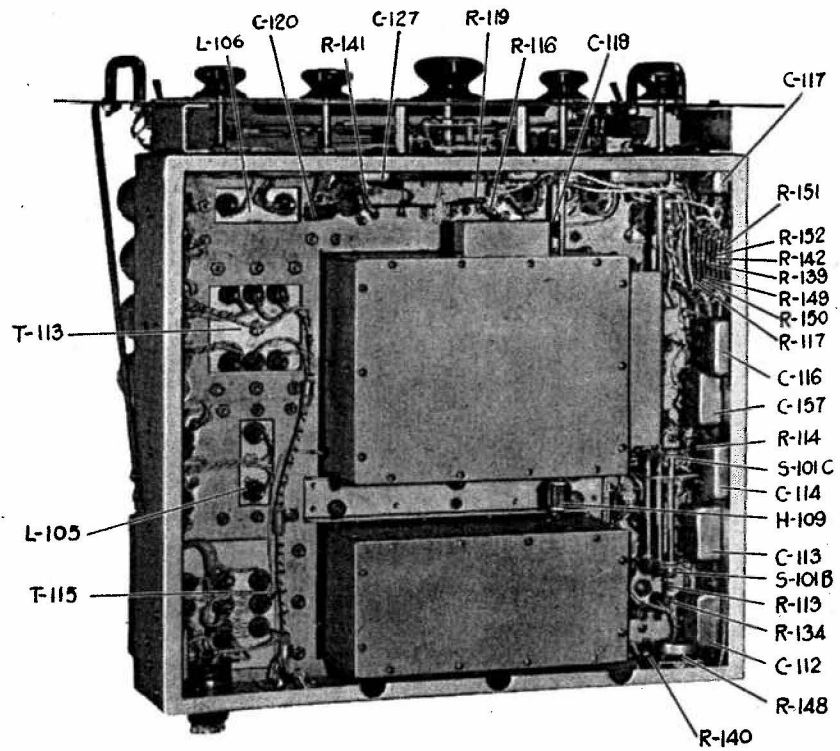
LEFT BOTTOM OBLIQUE VIEW, RADIO RECEIVER CHASSIS
